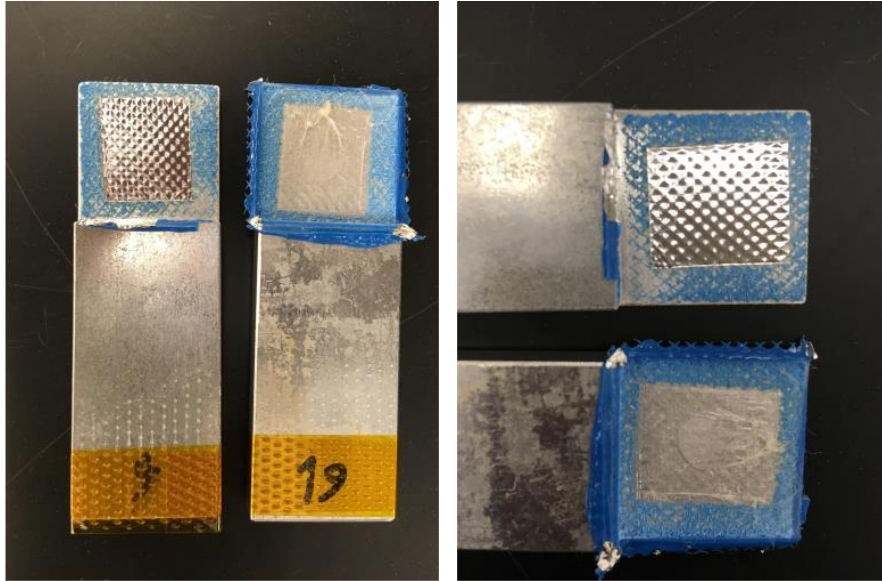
S11-19-9-R42-Fracture Surface
